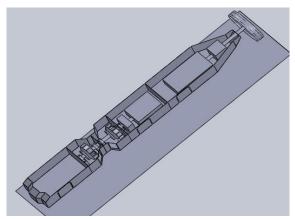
, Placement of machine, gearbox, impeller for lift, impeller for thrust, and holder (isometric view)
